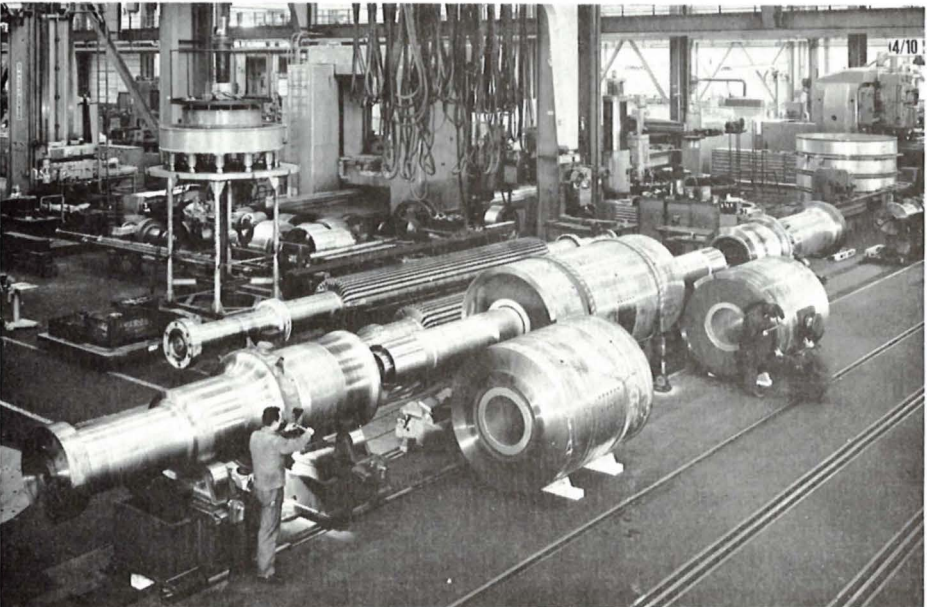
Parts of multipiece rotor for a 1333-MVA three-phase 1800 r/min turbine generator. The separate forgings will be shrunk on the shaft before final machining and milling slots for the windings. The total weight of the rotor is 435,000 lb. (*Brown Boveri Corporation.*)
